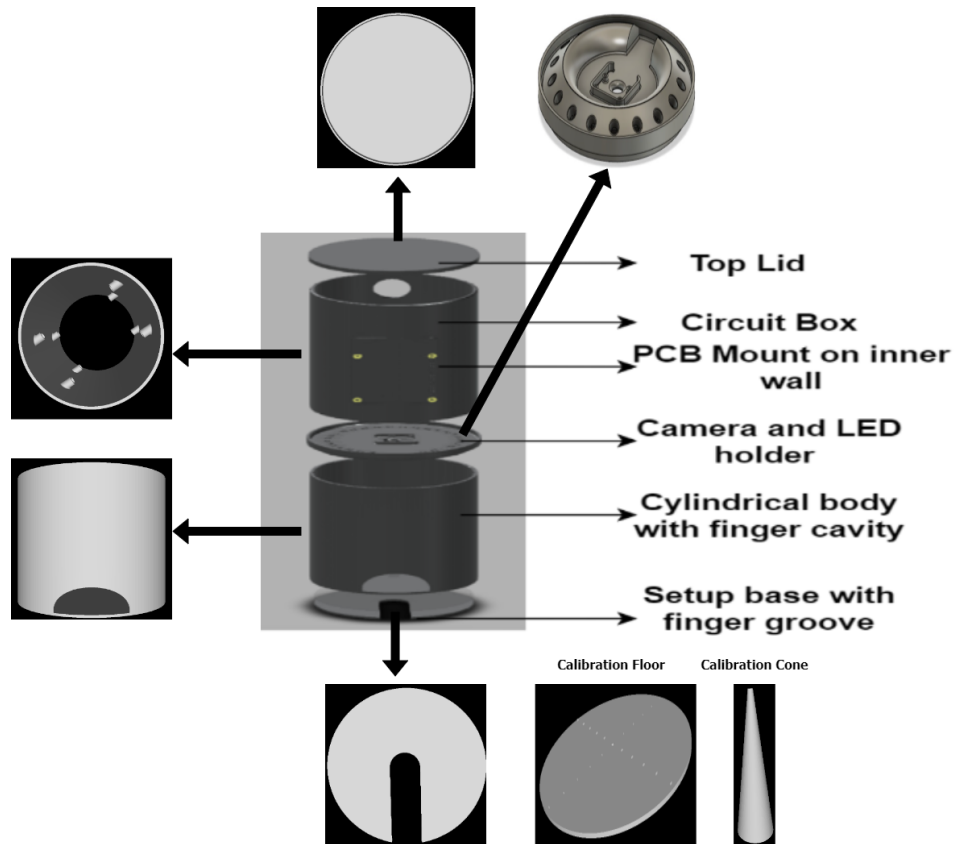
The figure details the components of the 3D printed setup for fingerprint capture and for further reconstruction using Photometric Stereo.
